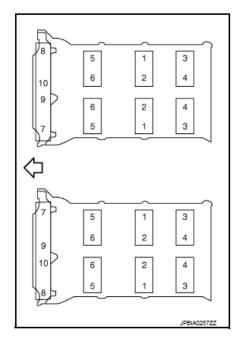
Identifying Camshaft Bracket Bolts With Tightening Sequence Courtesy of NISSAN NORTH AMERICA, INC.
